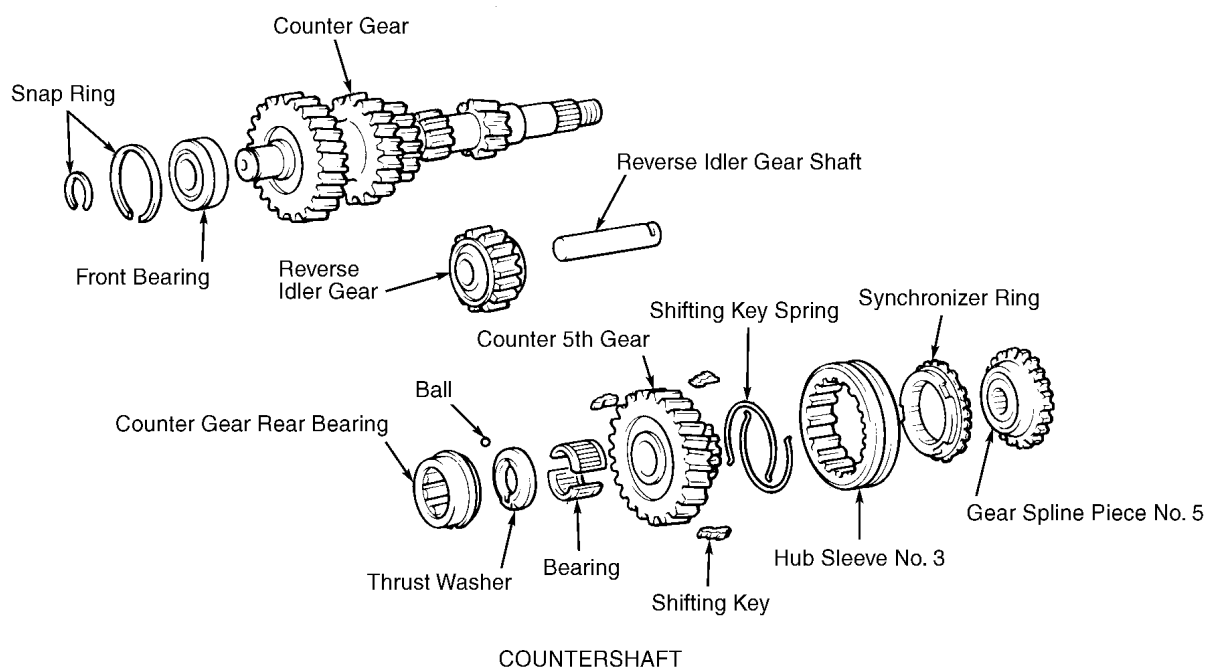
Exploded View Of Output & Countershaft Assemblies (1 of 2)
